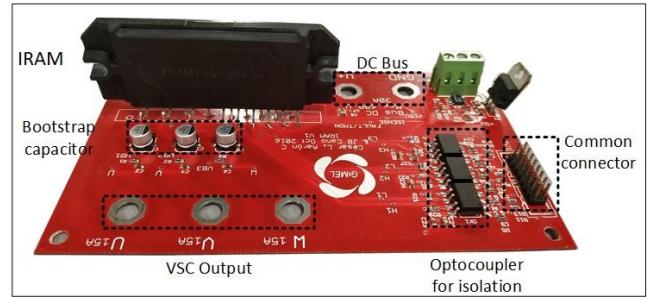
PCB IRAM136-3063B and Gate Drivers.
